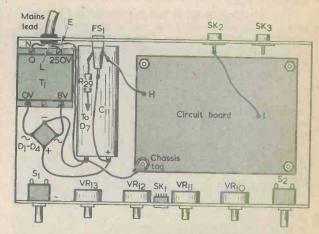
Wiring up the power supply components external to the board. Also shown is the connection to SK2
